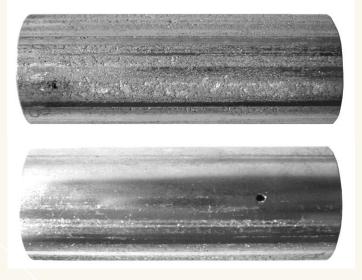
Macrograph after corrosion testing of an AL 29-4C[®] tube that was produced properly. (Sample Length = 2 inches)
